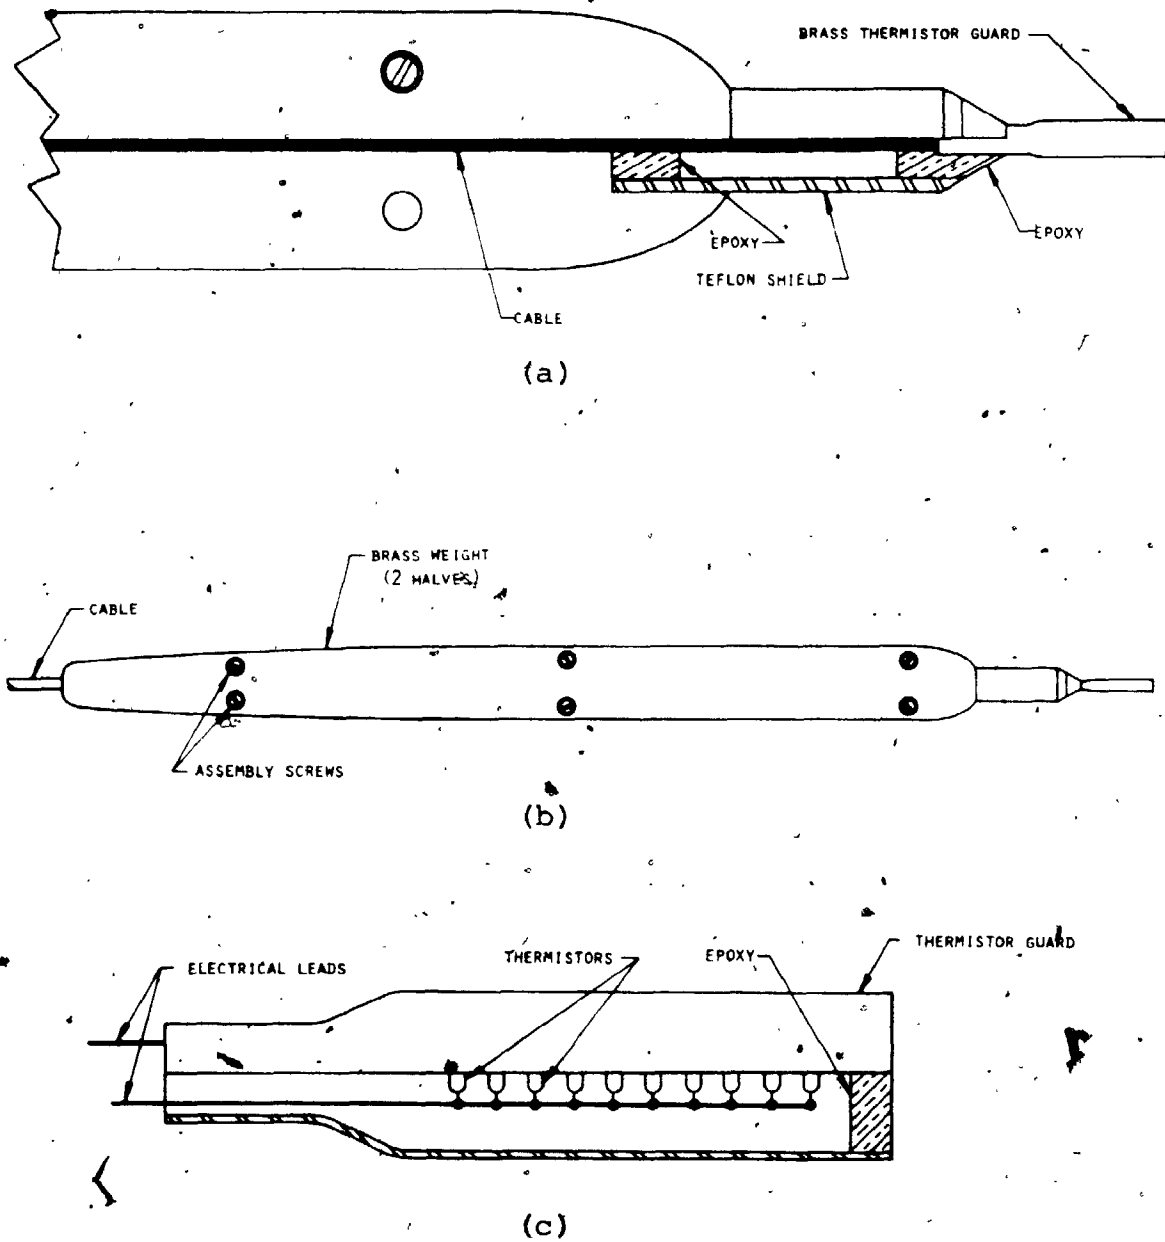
(a) The front section of a typical thermistor probe assembly, as used in the field tests
